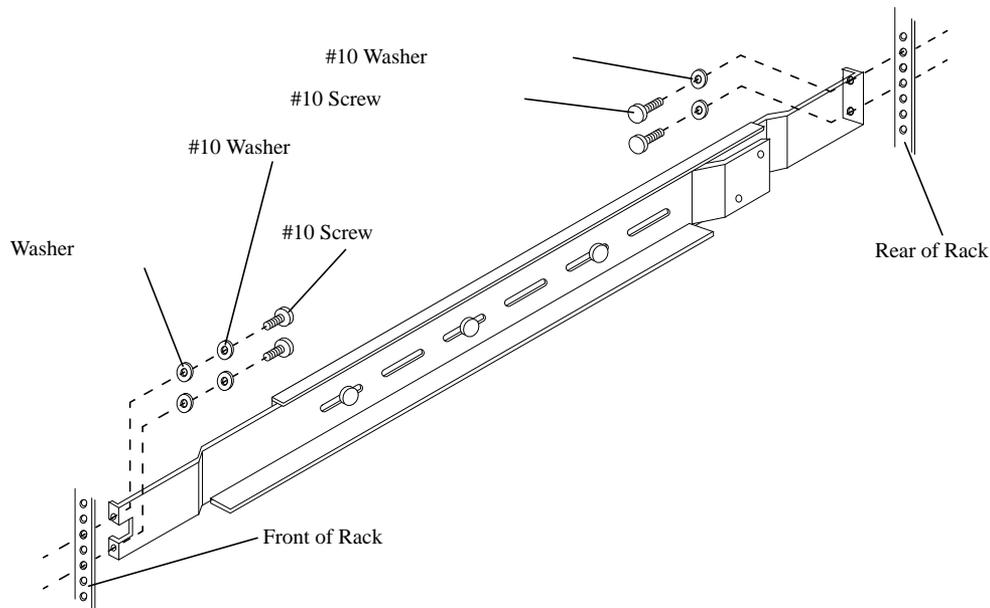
Fastening Rail/Support Assembly to Threaded-Hole Rack (Left Hand Side)
